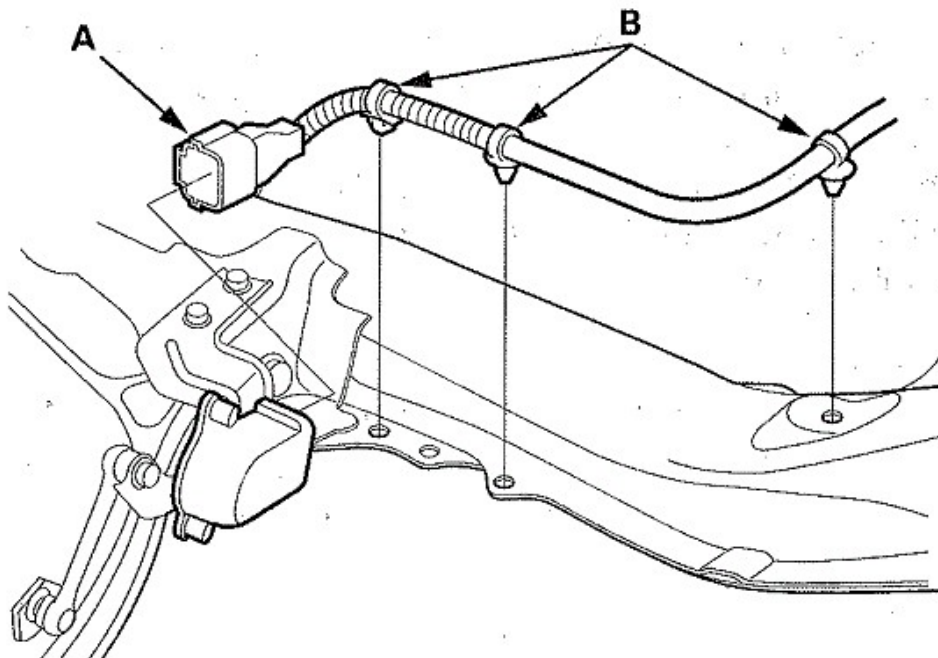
Identifying Front Suspension Stroke Sensor Connector And Harness Clamps
